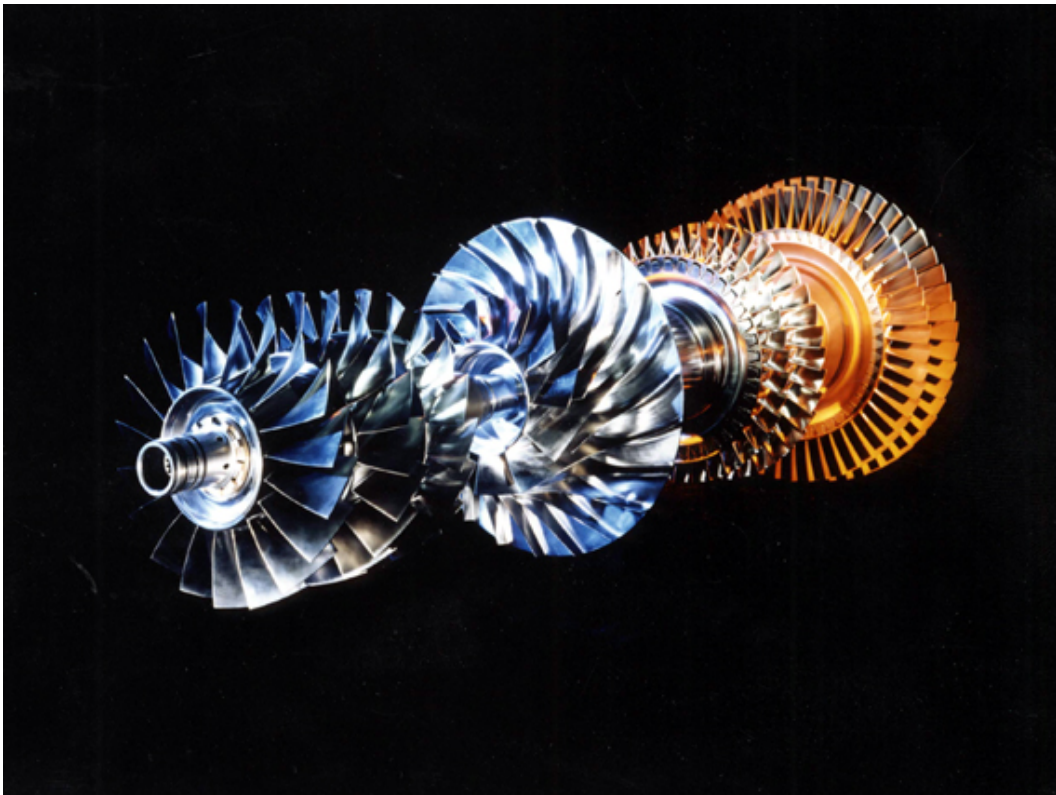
The rotating parts of the Makila helicopter engine (Turbomeca).
